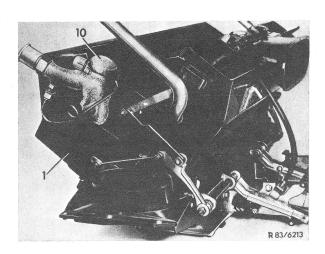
Layout of expansion valve with sealing tape 1 Evaporator box 10 Sealing tape
